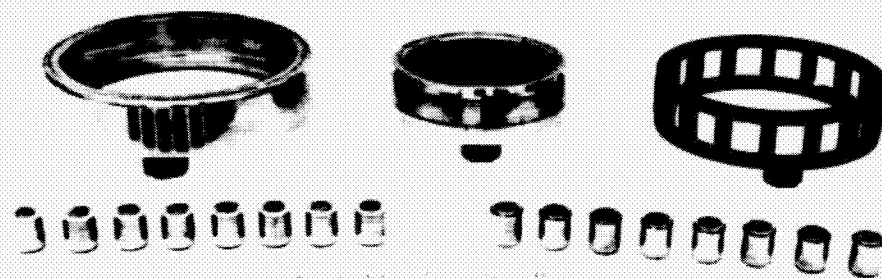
Posttest (Second Segment) Appearance of Motor Roller-Bearing Components Showing Heavy End-Wear on Roller Downstream Faces (Left Side)
